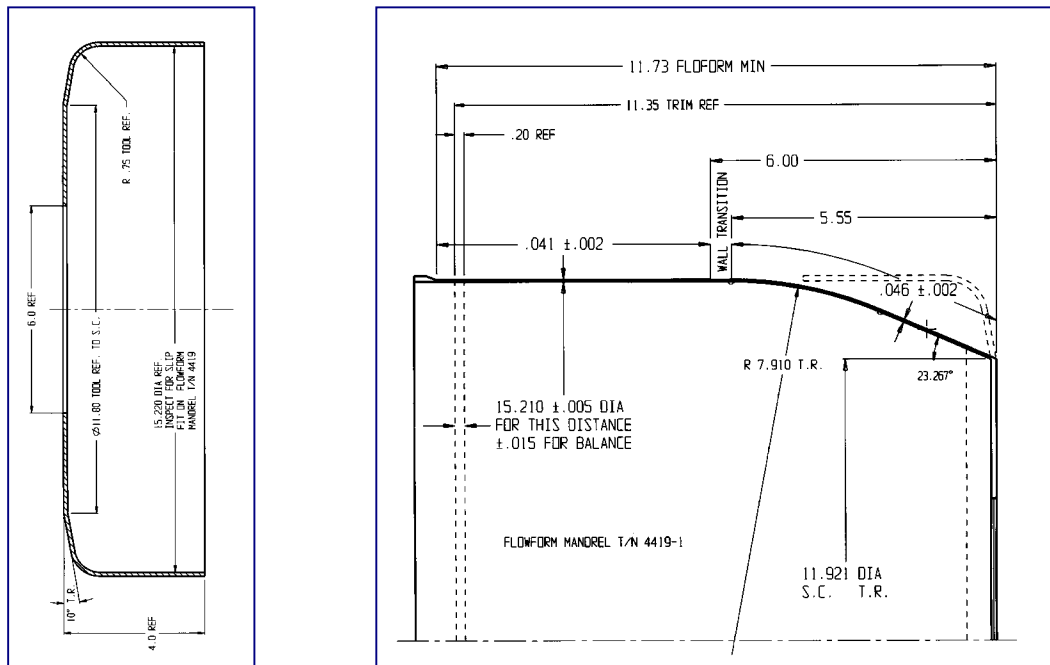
Preform shape and mandrel geometry (Courtesy of PMF-Industries) - Dimensions in inches
